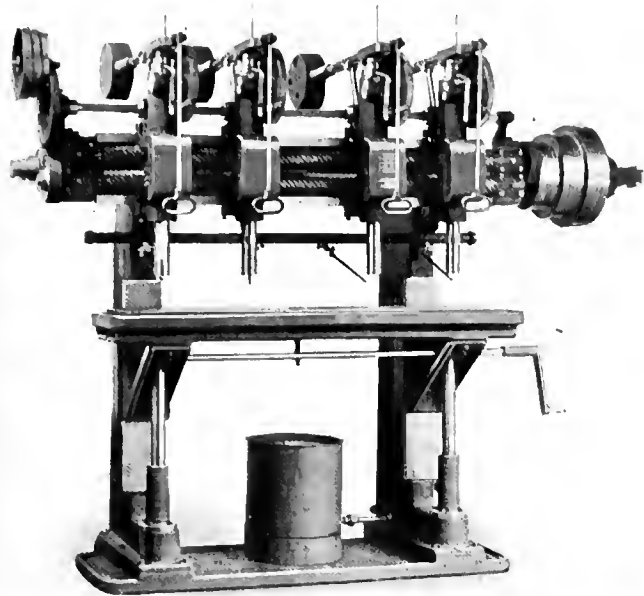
Moline No. 22 D Multiple Spindle Drill with Spindle Feed
